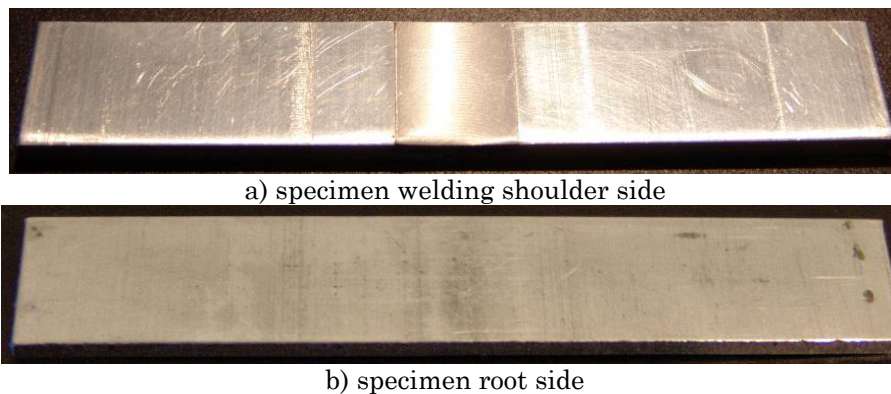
Visual inspection of FSW joints, top and back surfaces.
